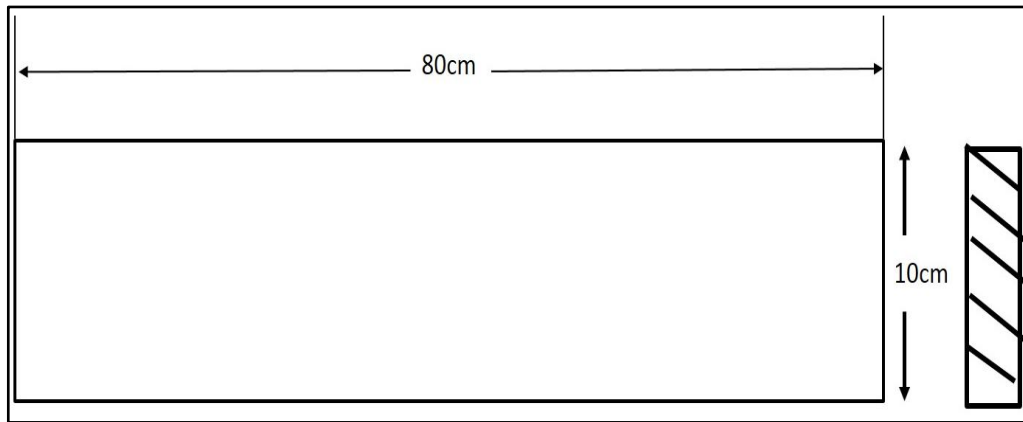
Preferred dimensions for ASTM D790 test specimen
